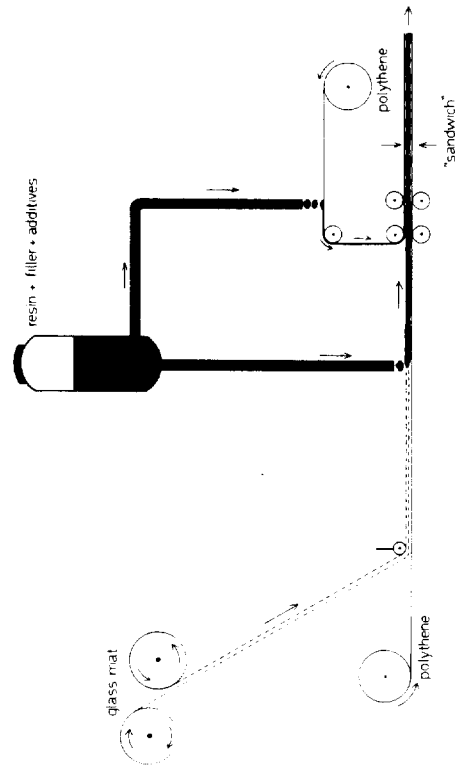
Principle of sheet moulding compound production. The resin-glass-filler composition is sandwiched between polyethylene sheets.
